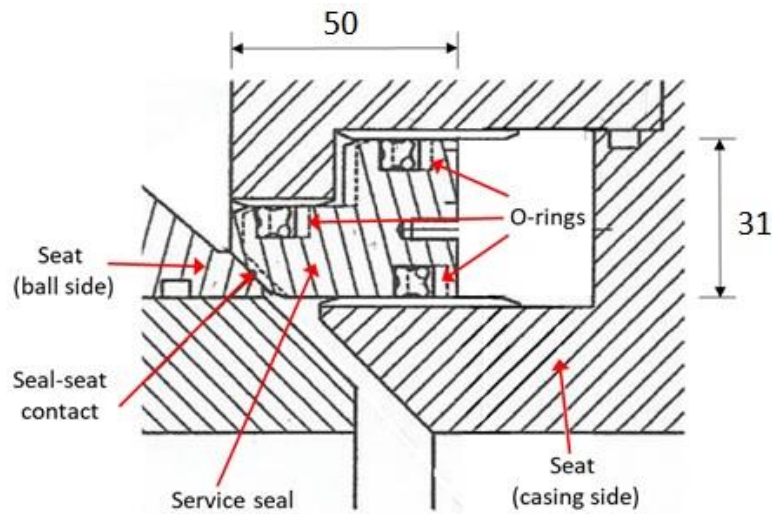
Sectional view of the service seal tightened on the ball seat (closed position). Dimensions in mm.
